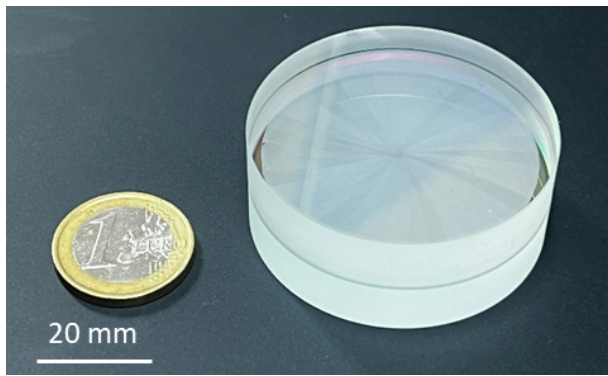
Assembly of two fused silica samples with a thickness of 10 mm and a diameter of 2 inches with anti-reflective coating on both sides. The welded pattern is a full spiral with a diameter of 45 mm.
